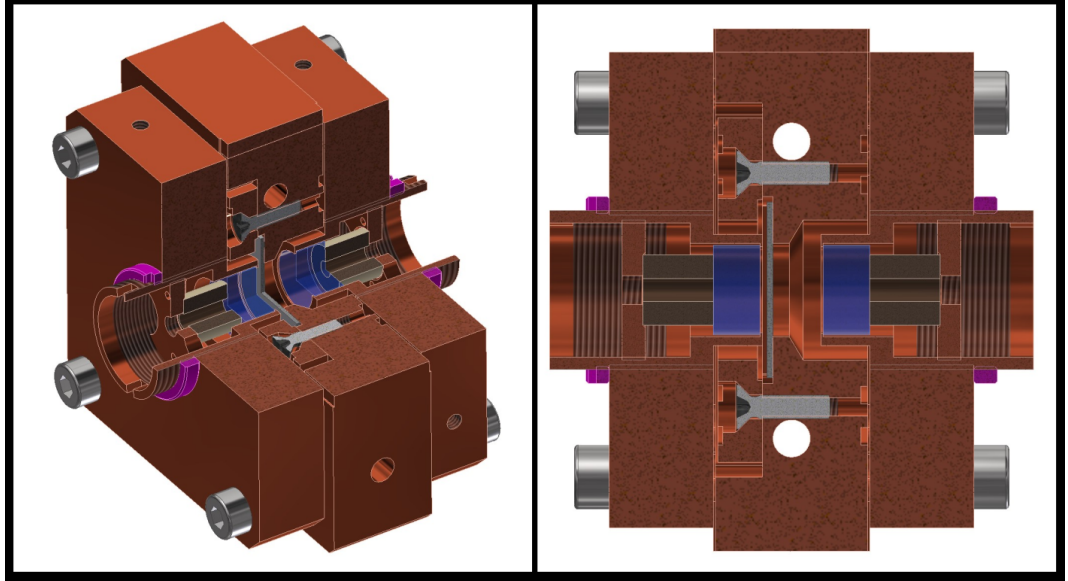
Optomechanical cavity assembly (more details in appendix E). The cavity mirrors are held in "barrels" (schematic in fig. E.1) along with a piezo. The barrels are fitted in a SM-05 threaded holder piece which is tightened to the membrane holder piece. The membrane lies in the holder piece (see figure 4.2) and is then clamped with a "coin" piece.
